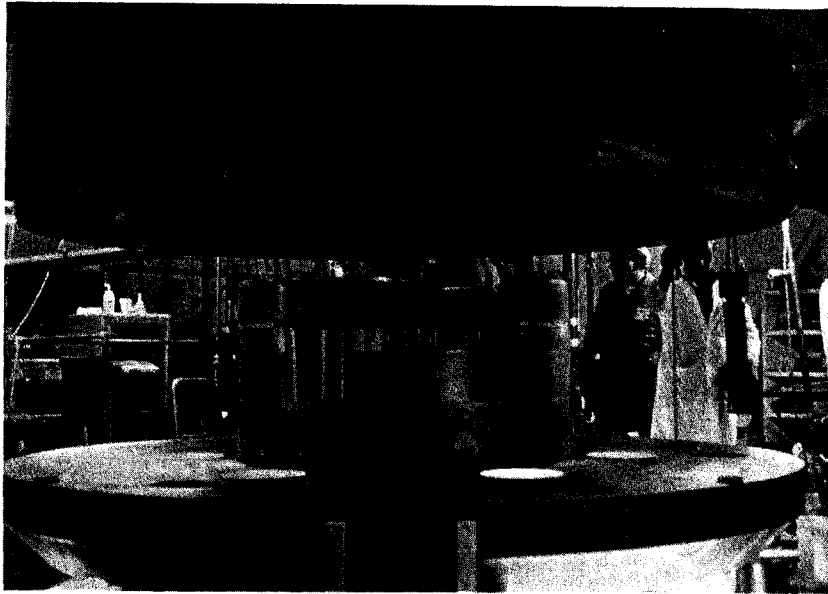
Lower iron return path ring being lowered onto lower pole cap. Lower iron hills with trim coils are seen at center.
